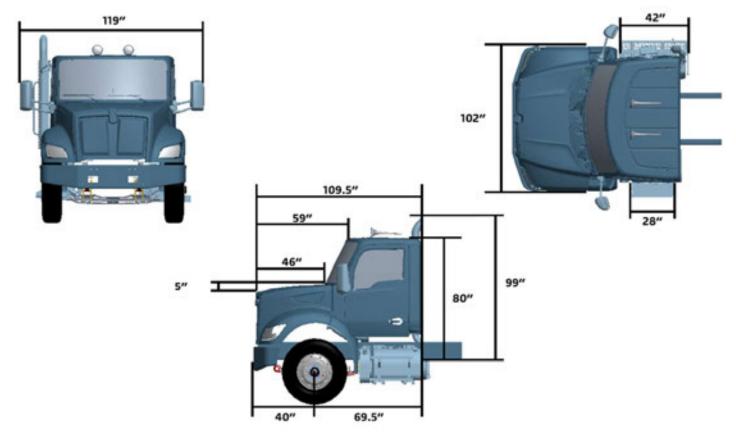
Vocational Hood (109.5" BBC) Top, Front & LH View – Overall Dimensions
